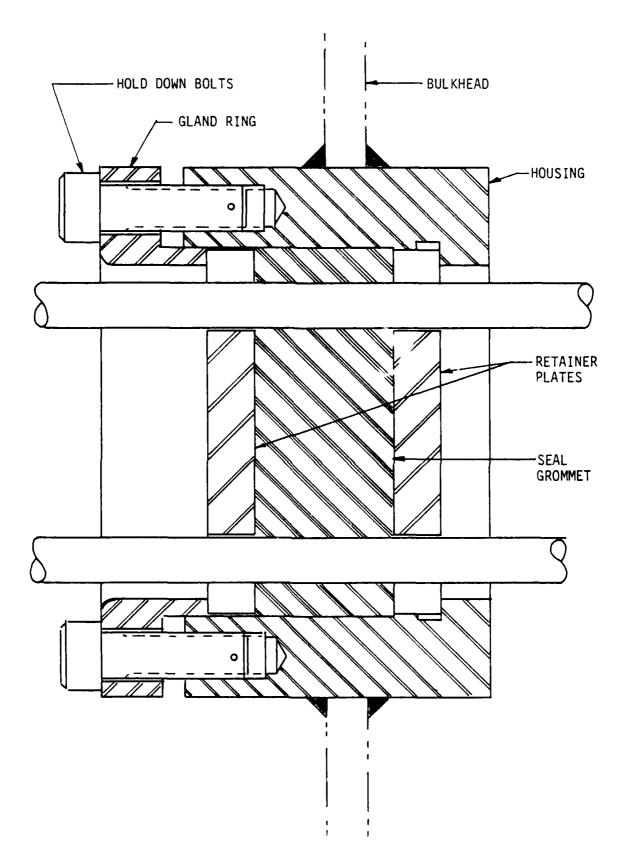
Multiple cable ballast tank bulkhead stuffing tube penetrator.
